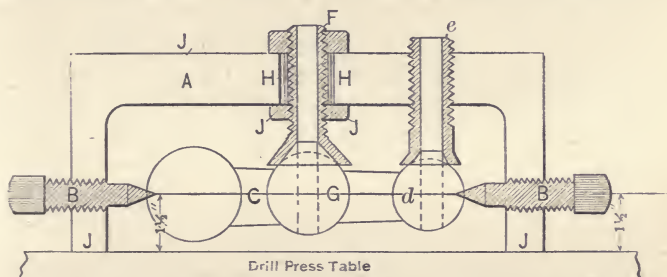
HANDLE-DRILLING FIXTURE. (SCHELLENBECK.)
